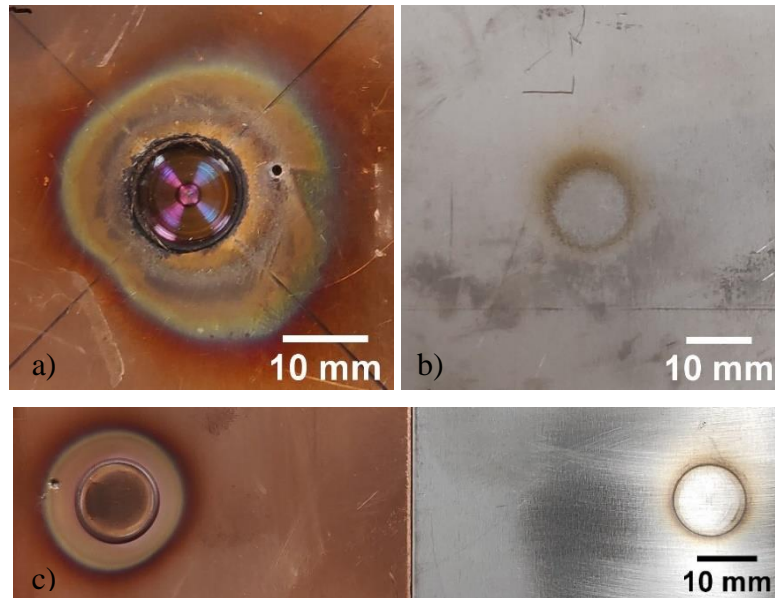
SP12-Cu/SS-1500-60-0.8 trial: a) surface weld, b) bottom weld, and c) interface.
